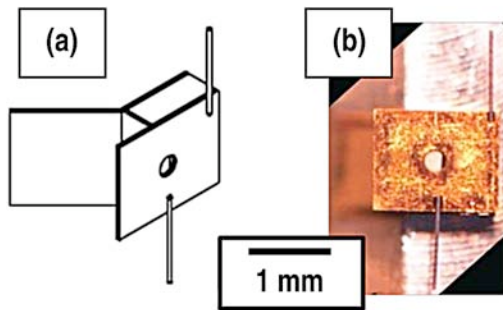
(a) Isometric drawing of final assembled target and (b) optical image of assembled target.
